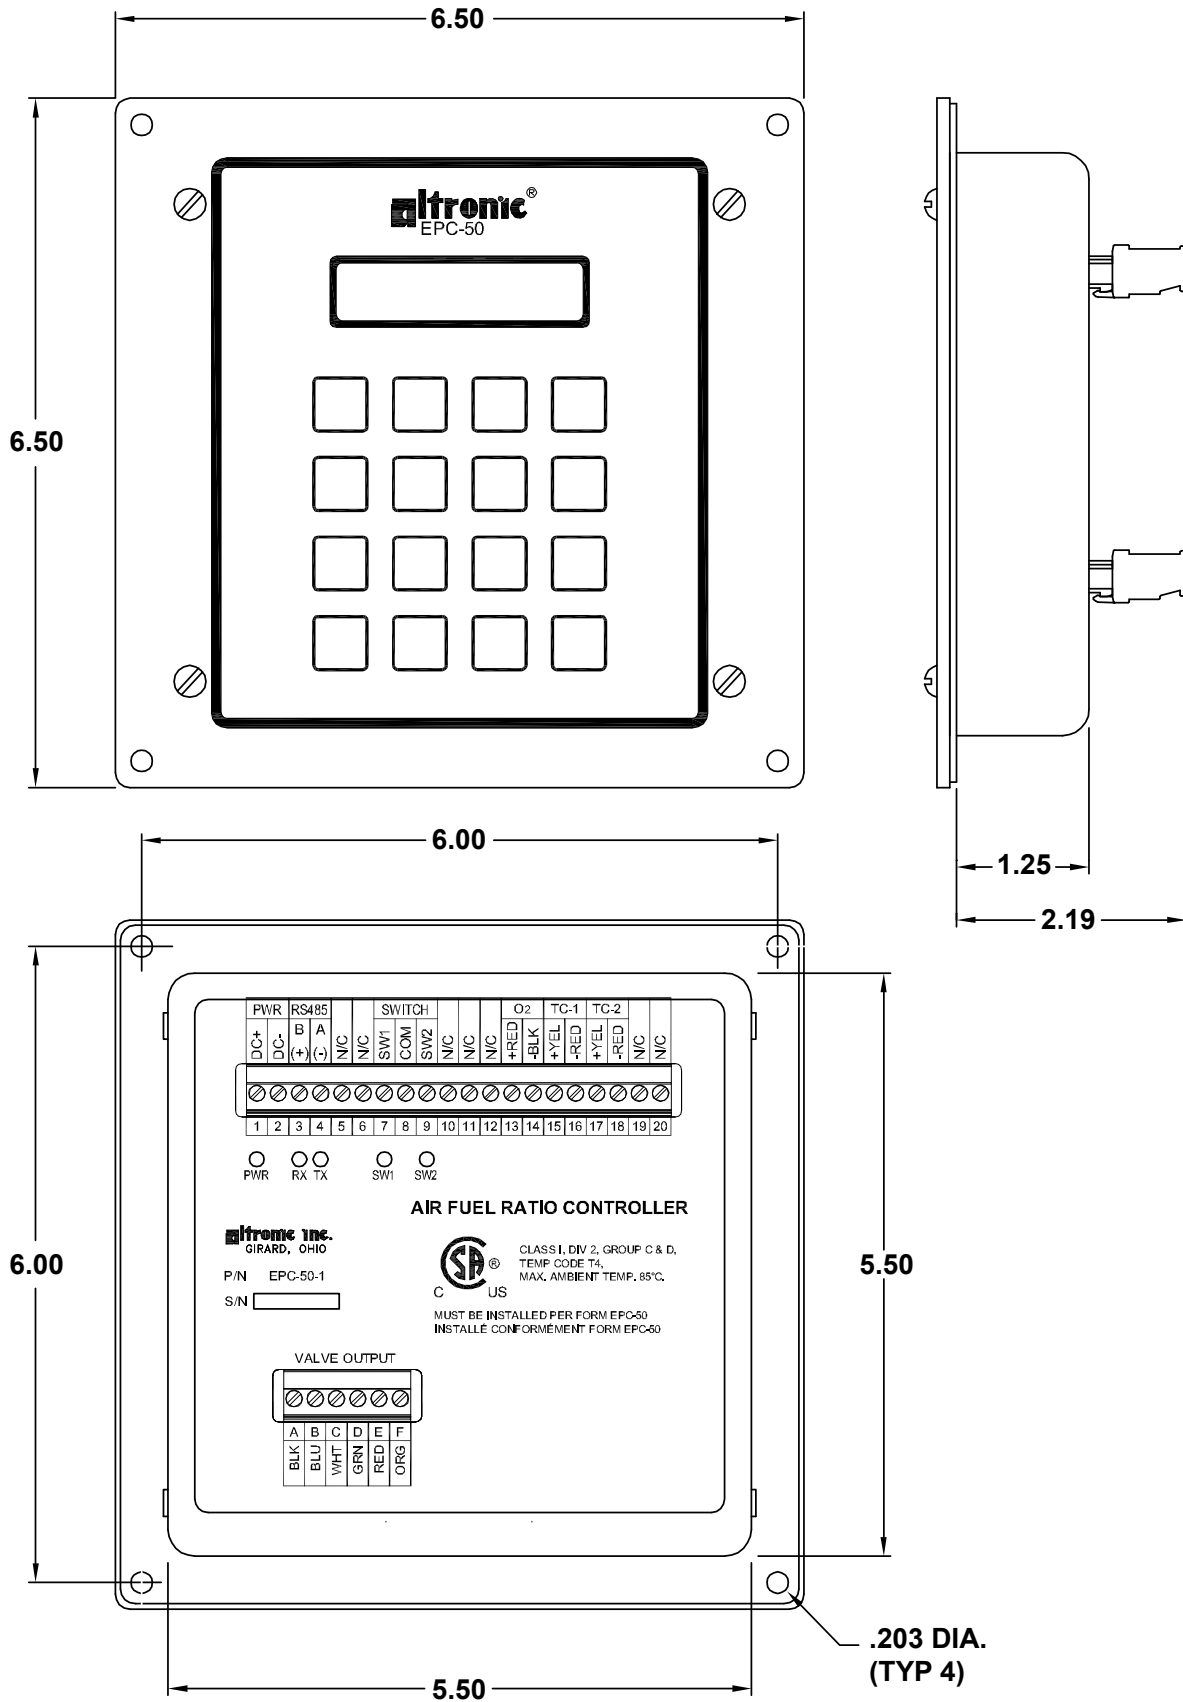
NEMA 3R ENCLOSURE MOUNTING DIMENSIONS
